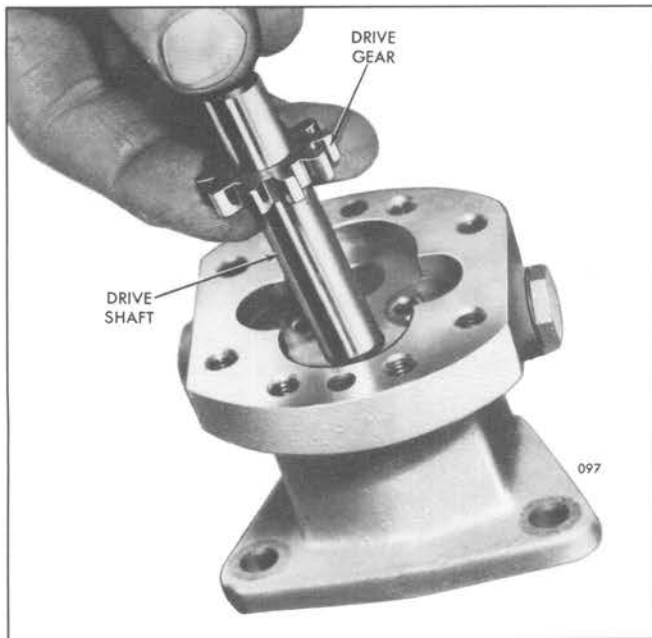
Installing Fuel Pump Drive Shaft and Gear Assembly
